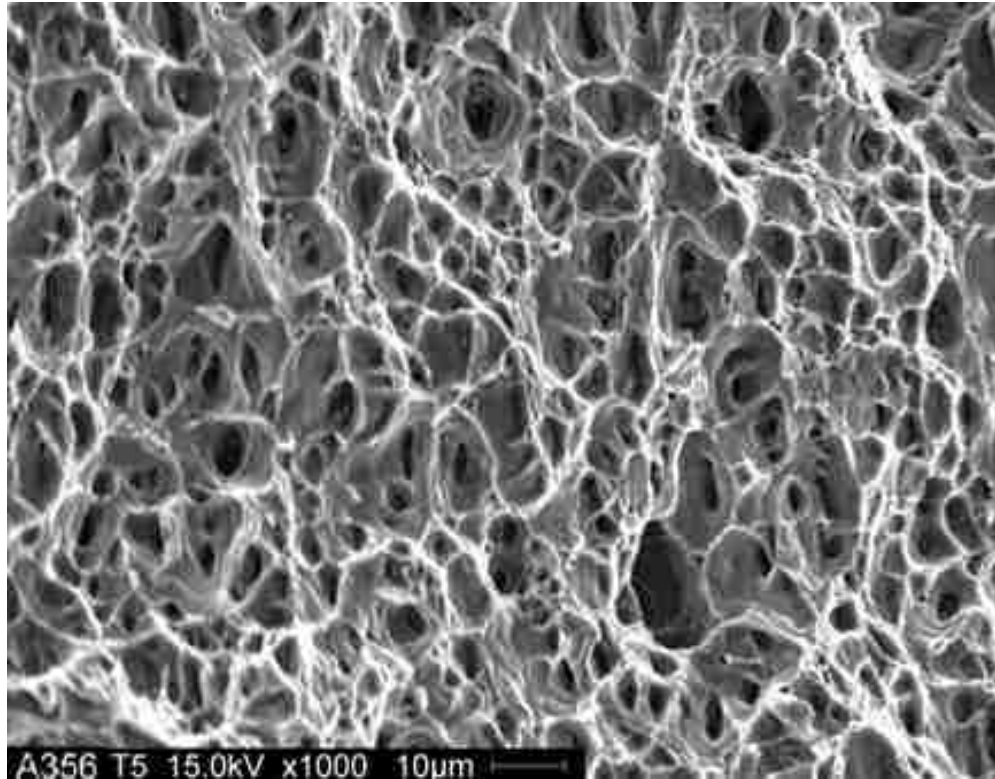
SEM fractograph showing the fracture surface of T5 cast alloy A356
